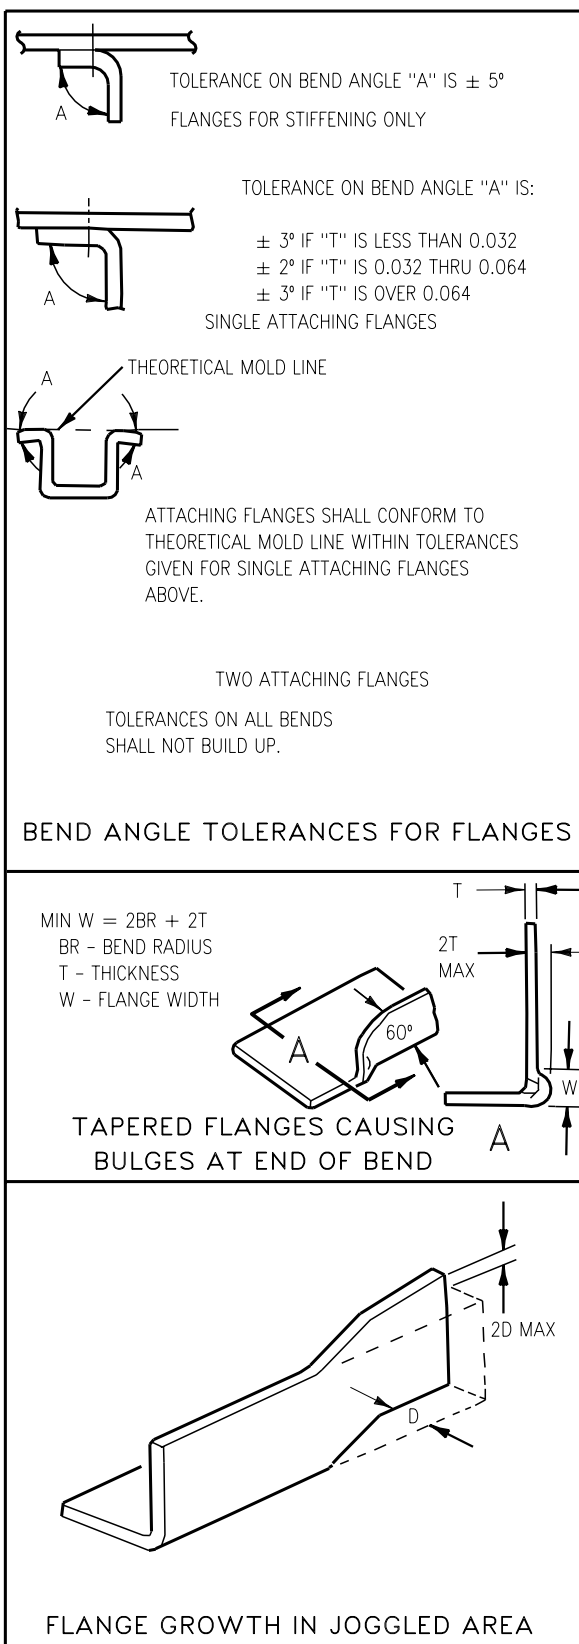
Sheet Metal Inspection Requirements (Sheet 1)
